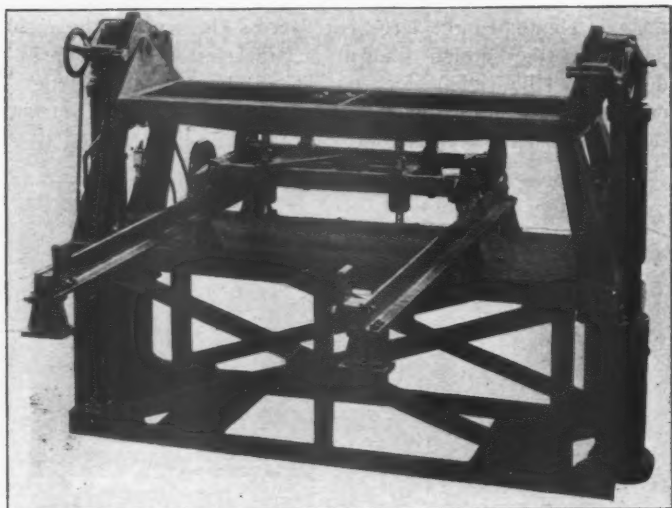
A MACHINE WITH BASE CONSISTING OF SEVERAL CASTINGS FITTED TOGETHER WITH MACHINED JOINTS
